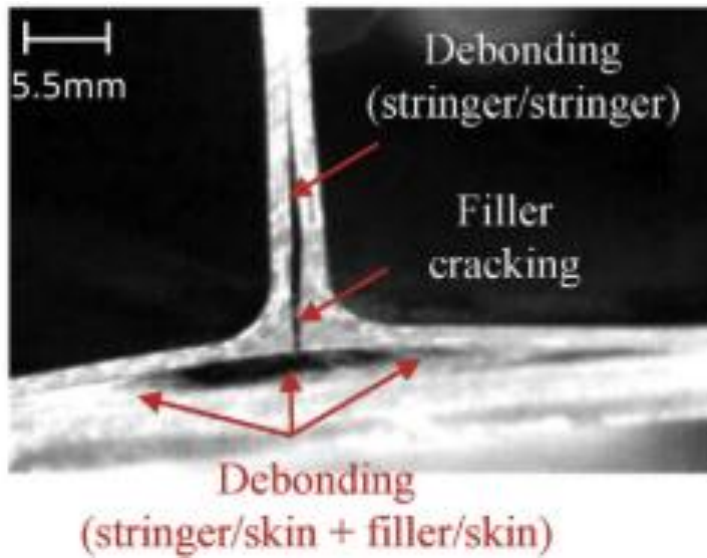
Failure Modes of the T-Joint Specimen after Pull-out Load [143]
